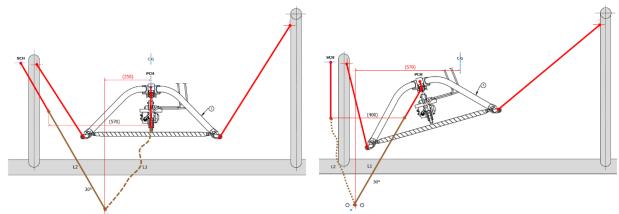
Fig. C: Hook arrangement loaded, Y-Rope 30° backwards deflected
